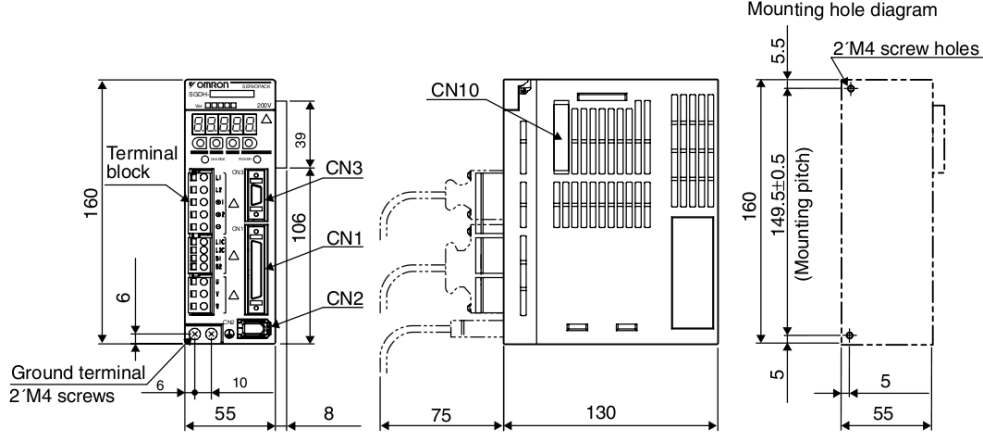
Dimensional drawing of the Omron-Yaskawa servo-drive (mm) [119].
